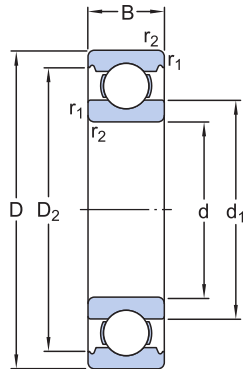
Illustrated Dimensions of 6206 Ball Bearing [15]
